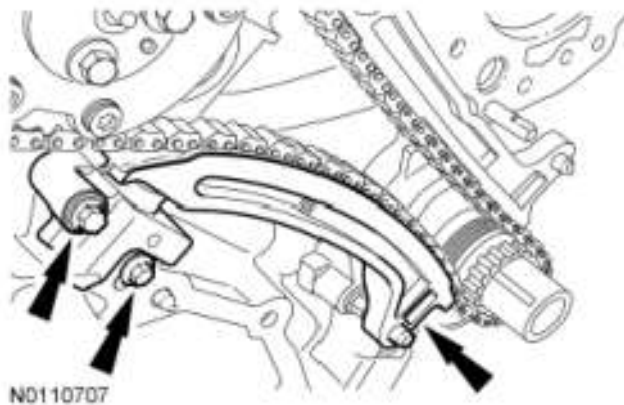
Locating RH Timing Chain Tensioner And Tensioner Arm
